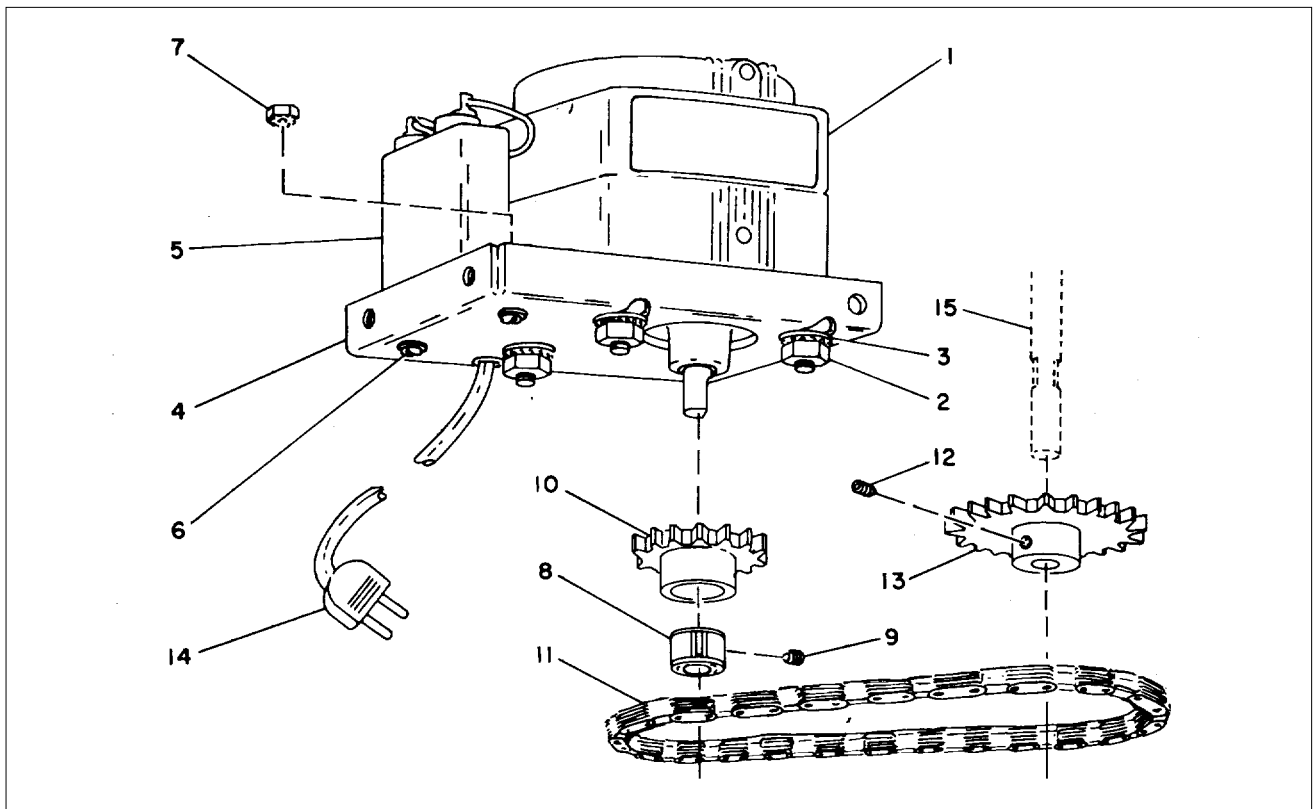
MM/Min. Drive Motor Kit - 60:1 (07702 - 60110) (07702 - 60220)
